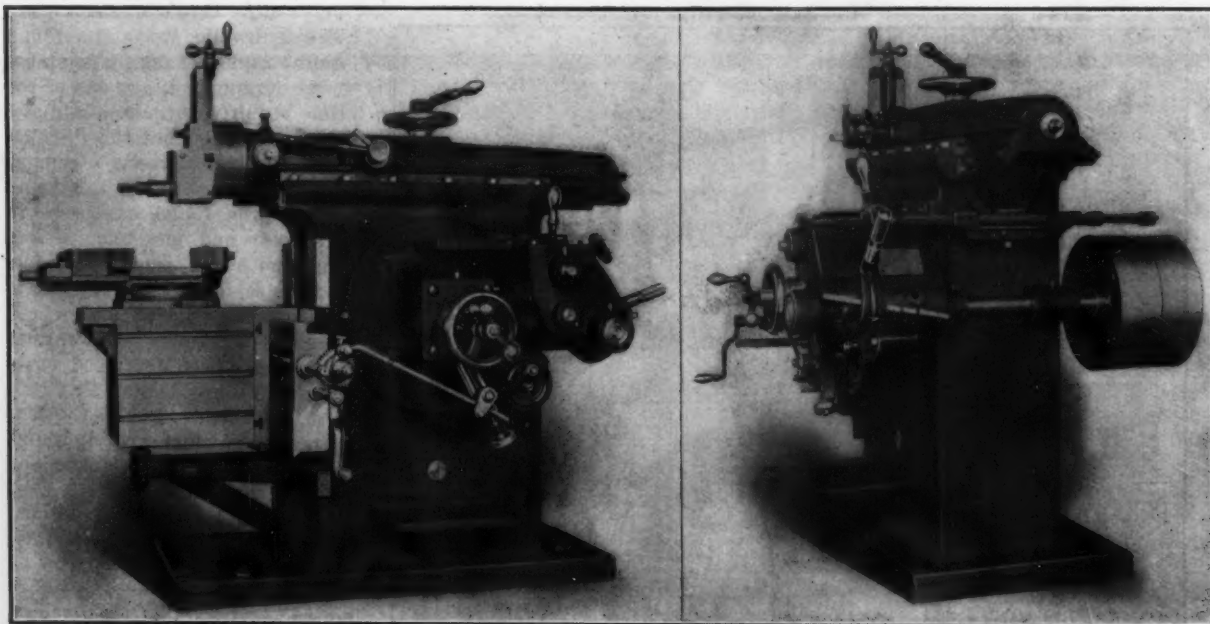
Two Views of the New 20-In. Shaper Built by the Mark Flather Planer Company, Nashua, N. H.
